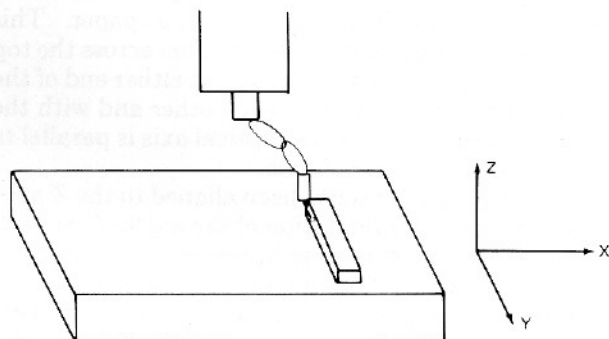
Aligning gage block parallel to Y axis. Machine axes are indicated.
